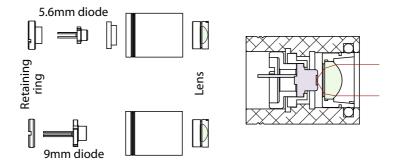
Lens tube assembly, showing diode, lens, and mounting hardware. The same tube can be used for 5.6 mm and 9 mm diodes. Note that your lens tube may have alignment adjustment screws.
